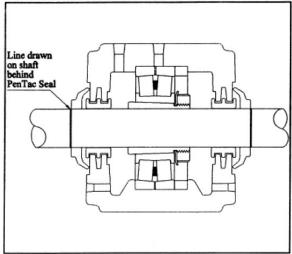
Complete assembly of D-5 PenTac showing reference line drawn on the shaft.
